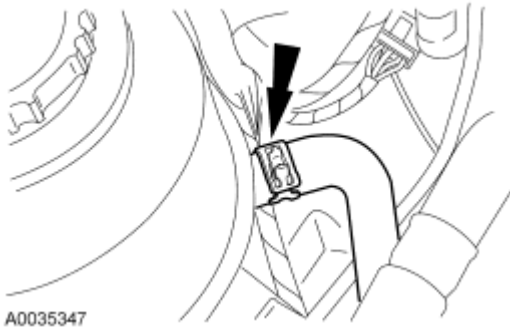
Locating Vacuum Reservoir Tube Connection
